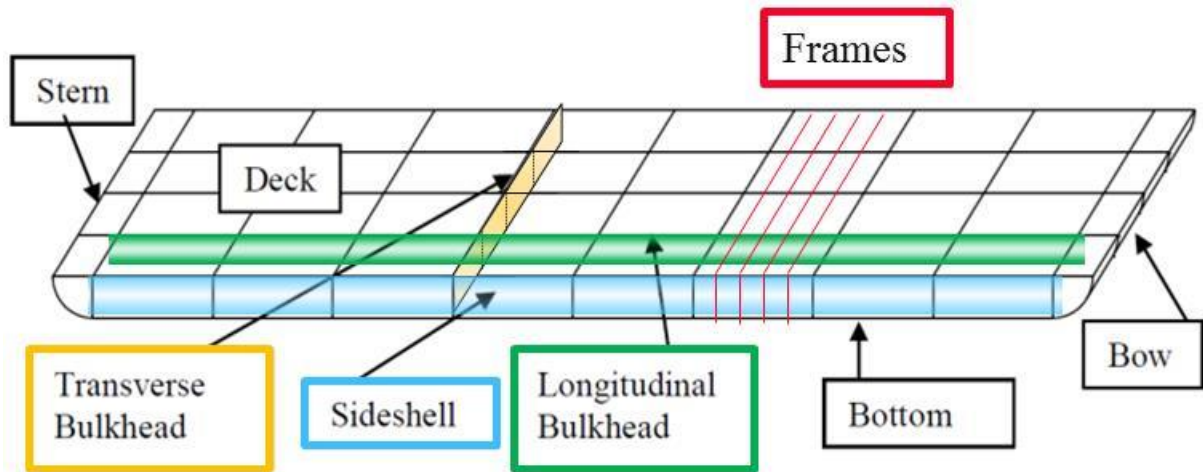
Figure III.D Simplified figure of a barge. Overview of parts and plate fields a barge consists of. Bulkheads, bottom/ -deck plating and side shell are highlighted in order to create a clear view of important parts of a barge.
